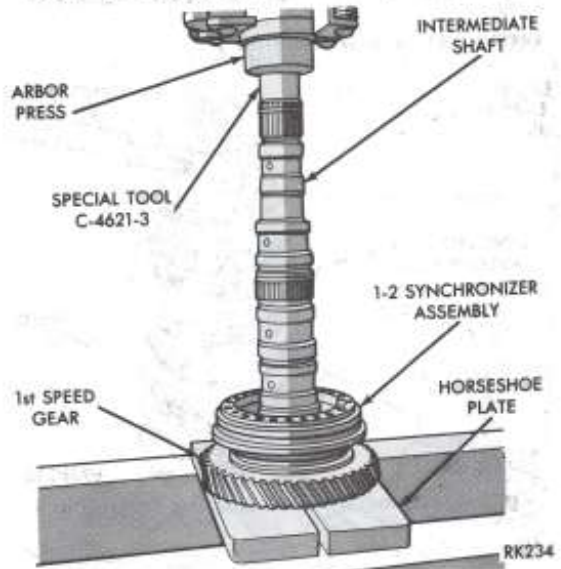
Remove 1-2 Synchronizer Assembly (A525)
